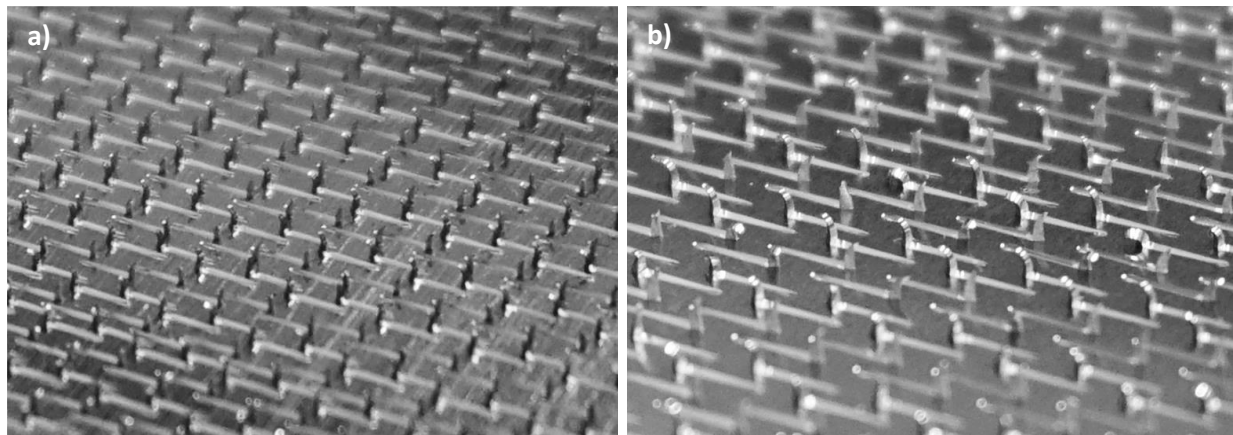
Examples of as-received aluminium 5052-H38 GRIP Metal™ sheets: a) Nano hook size, b) Standard hook size
